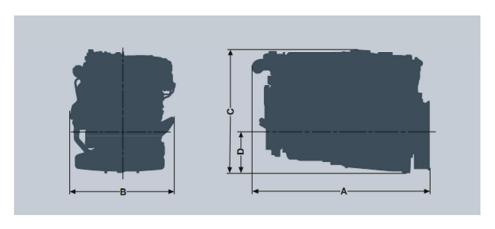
Dimensions D2676 engine, (MAN engines 2010)
